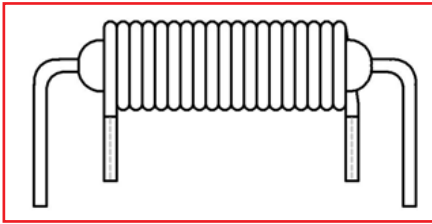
Construction and assembly of reed relay (RLA) coil. Using 1.0mm dia. enamelled copper wire, you need to wind approximately 18½ turns of wire on a 3.5mm dia. former (ie drill shank). The coil is removed and then slid over the glass-encapsulated relay. The coil ends and relay leads are then formed to fit into the PCB
